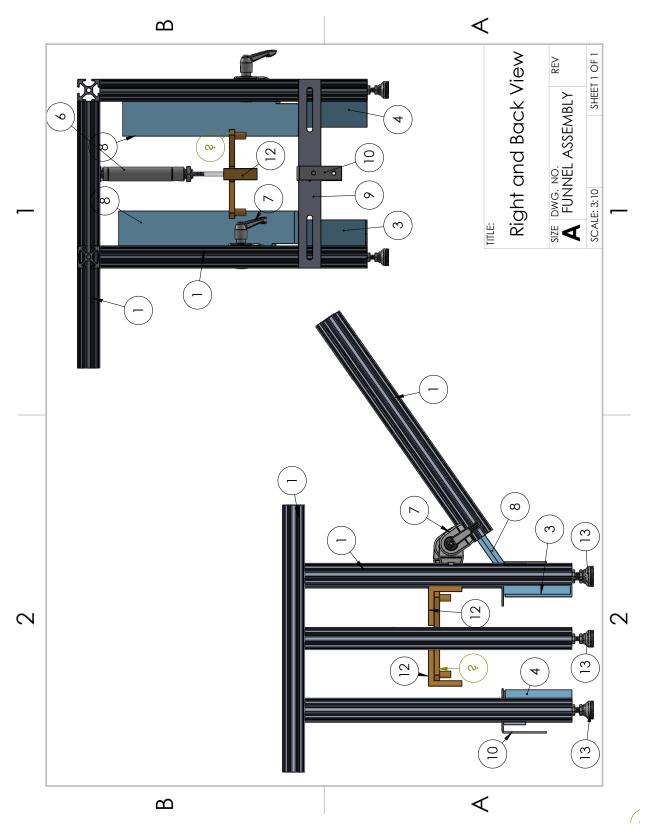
Funnel Assembly Drawing right and back (not to scale) 149
